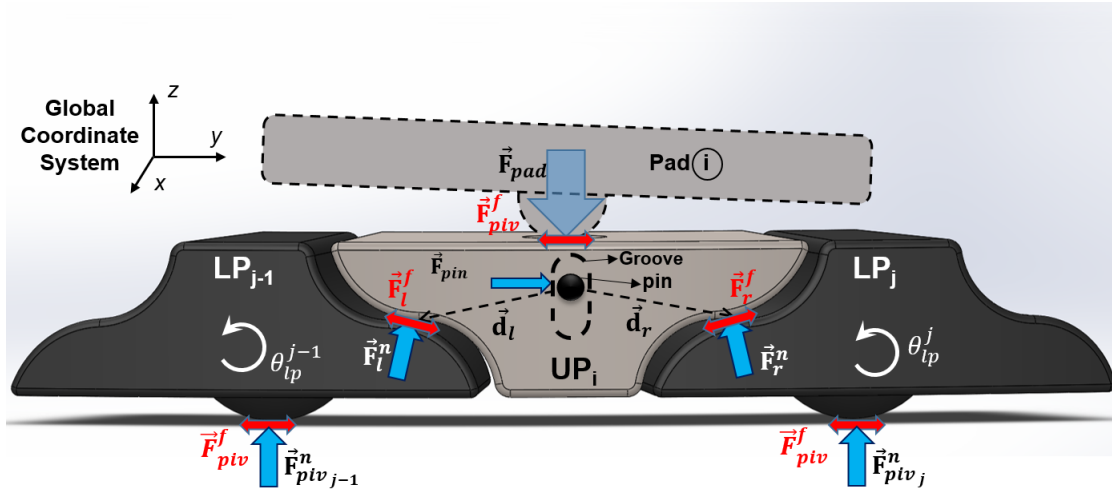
Schematic view of a thrust pad and support upper plate, both carried on the shoulders of two adjacent lower plates. Forces acting on the plates shown. Reprinted with permission from [3].
